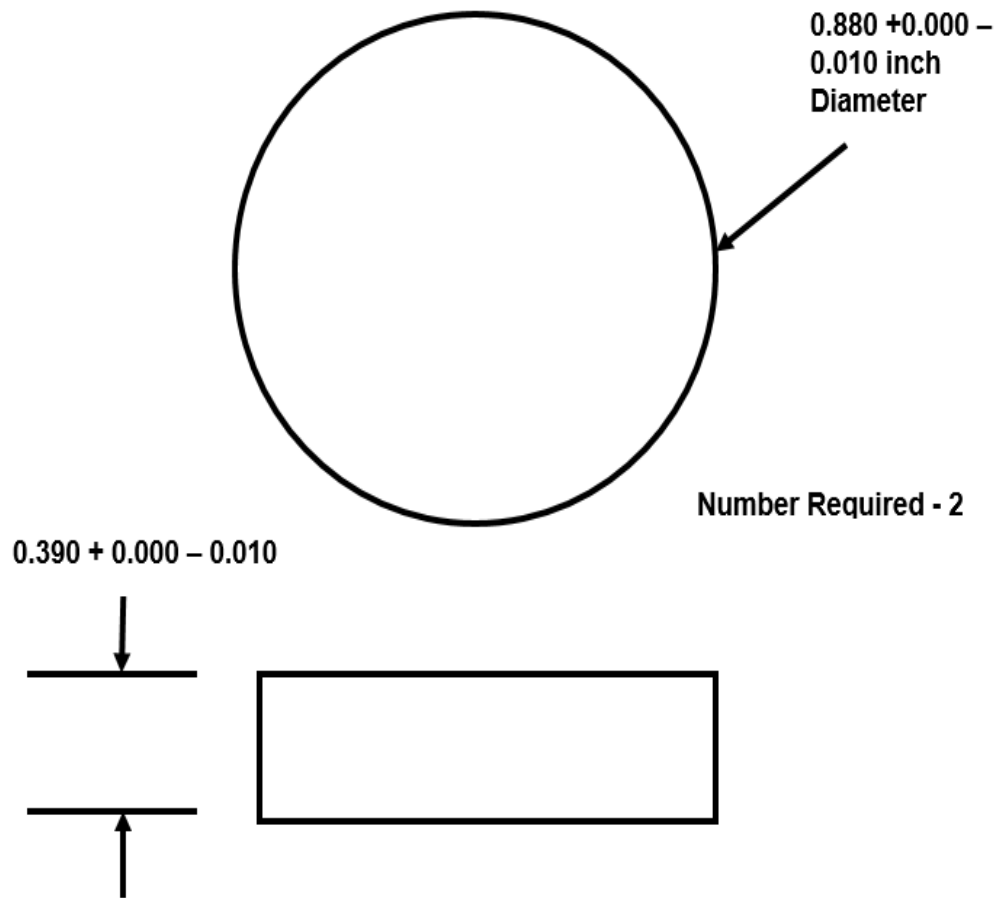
RTF inset disk for inset cylinder drawing (SS 304)
